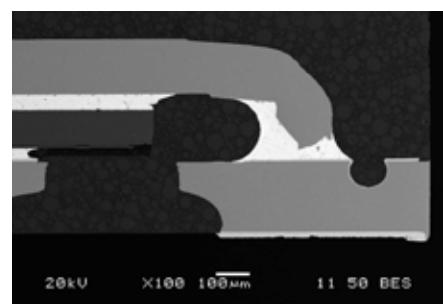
Use of solder as the die-attach material in the formation of interconnects in a clip-bonded package.
